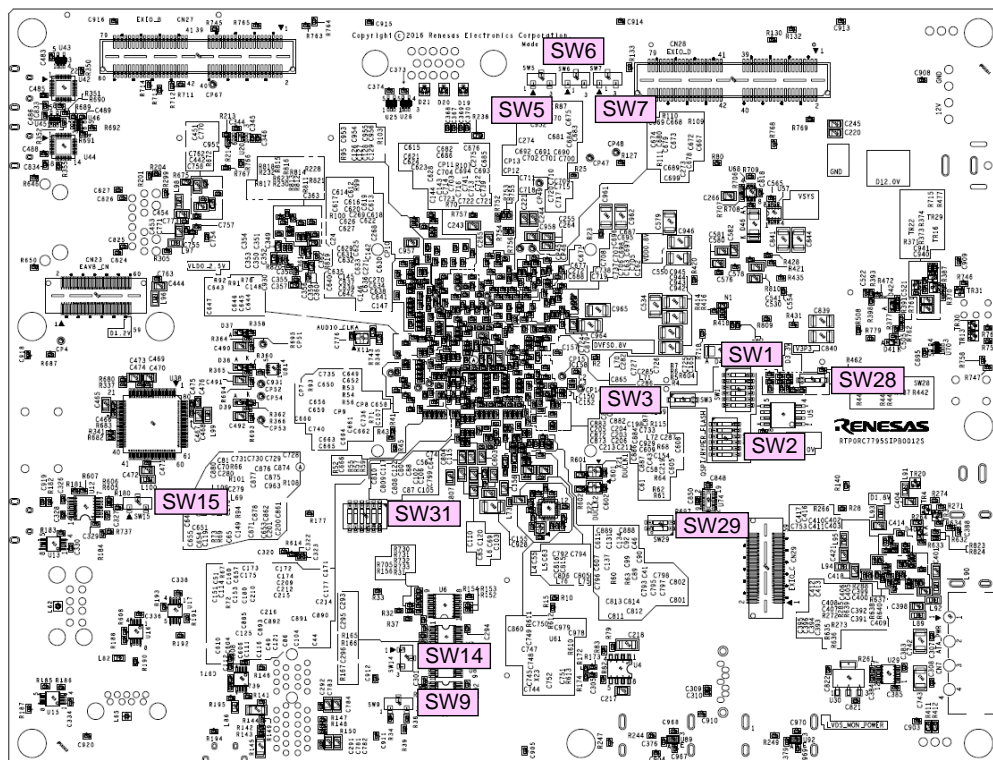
Location of Switches on the Salvator-XS Board (Solder Side)
